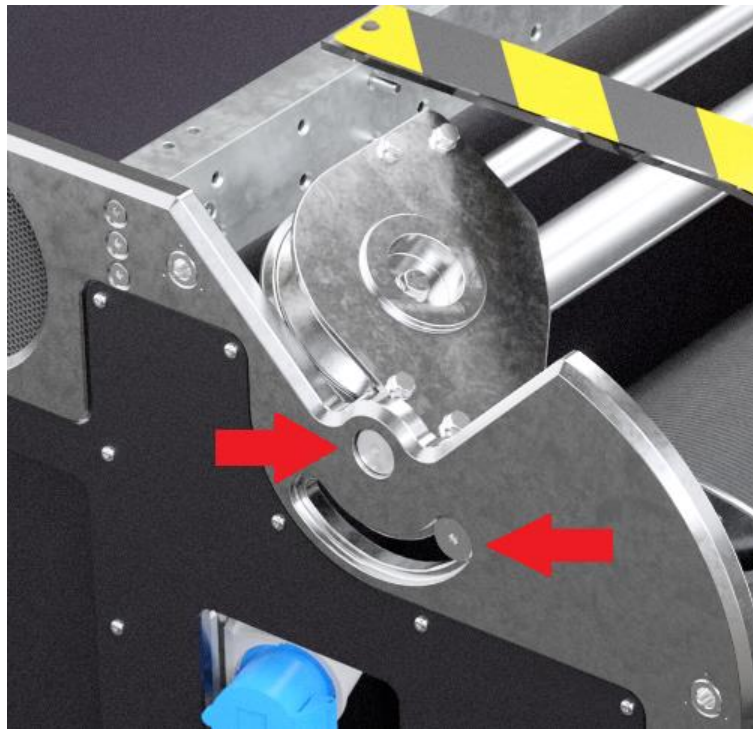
SCL CABLE OUTLET PULLEY SCREWS
